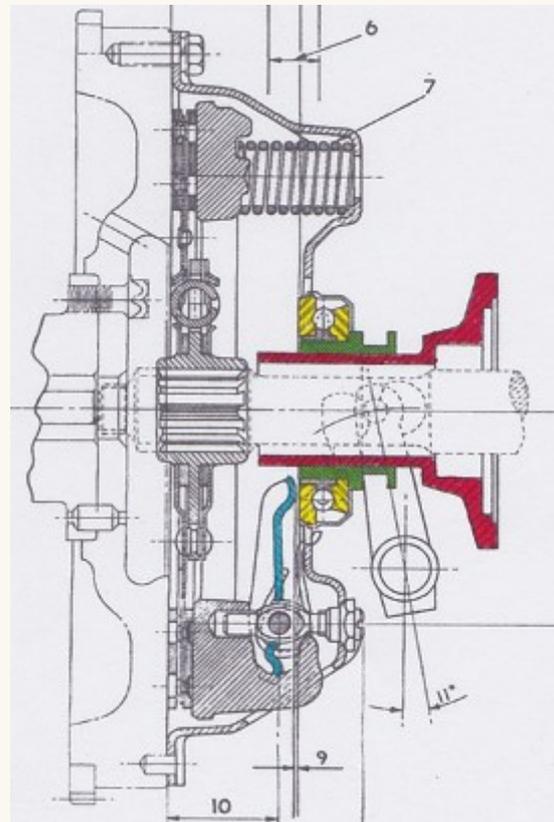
Modified Stag clutch release bearing & carrier with rubber mounted bearing.
